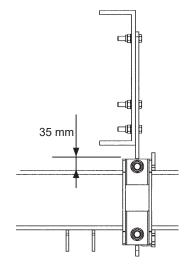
The chassis bracket requires at least 35 mm clearance between vehicle chassis and support frame
